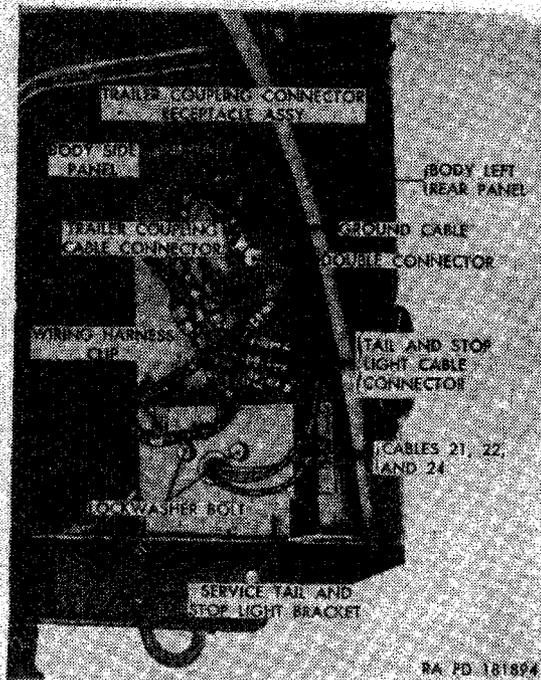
Trailer coupling electrical connector receptacle and service tail and stop light assemblies (M38A1)—disconnect points in wheel house—guard removed.
